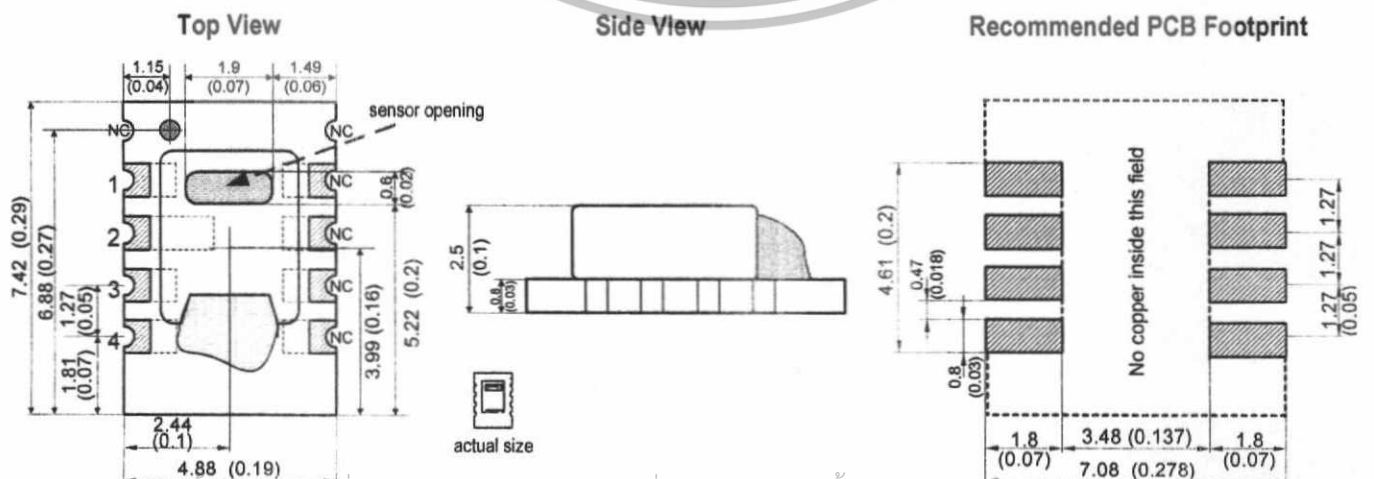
SHT1x drawing and footprint dimensions in mm (inch)
